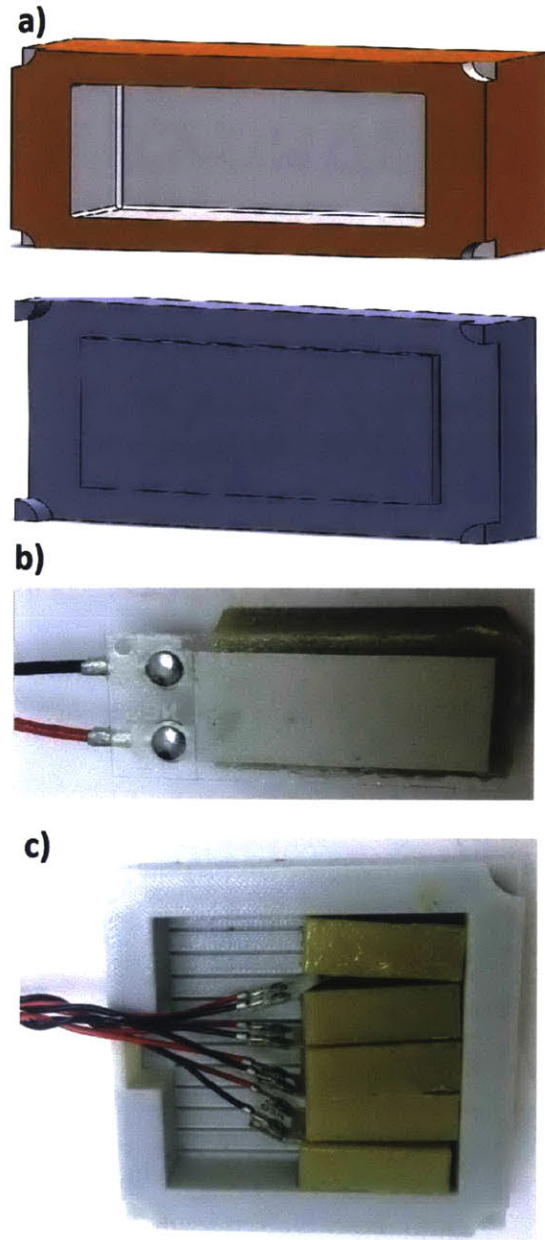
(a)CAD of the spacer mold. (b) Sensor attached to the spacer using a primer. (c) Spacers and sensors placed in the Footpad mold.
